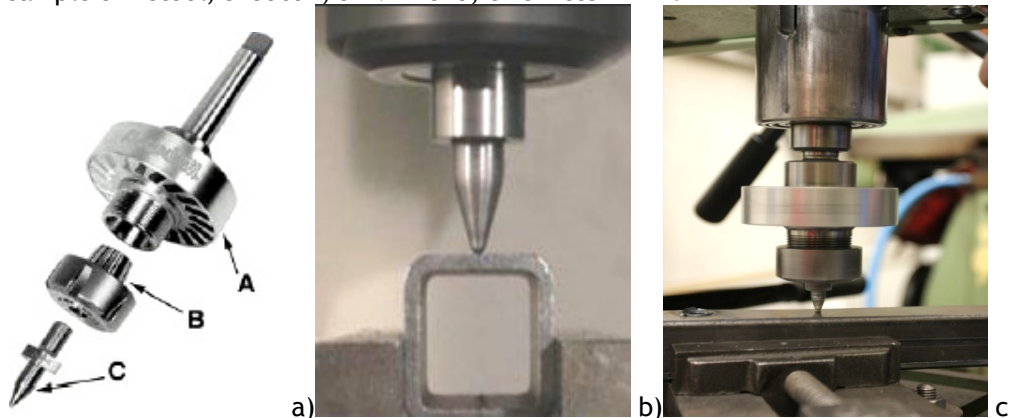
a) Flowdrill tool parts (A - special toolholder, B - collet, C - Flowdrill). b) The detail of tool without cutter. c) Testing workplace.
